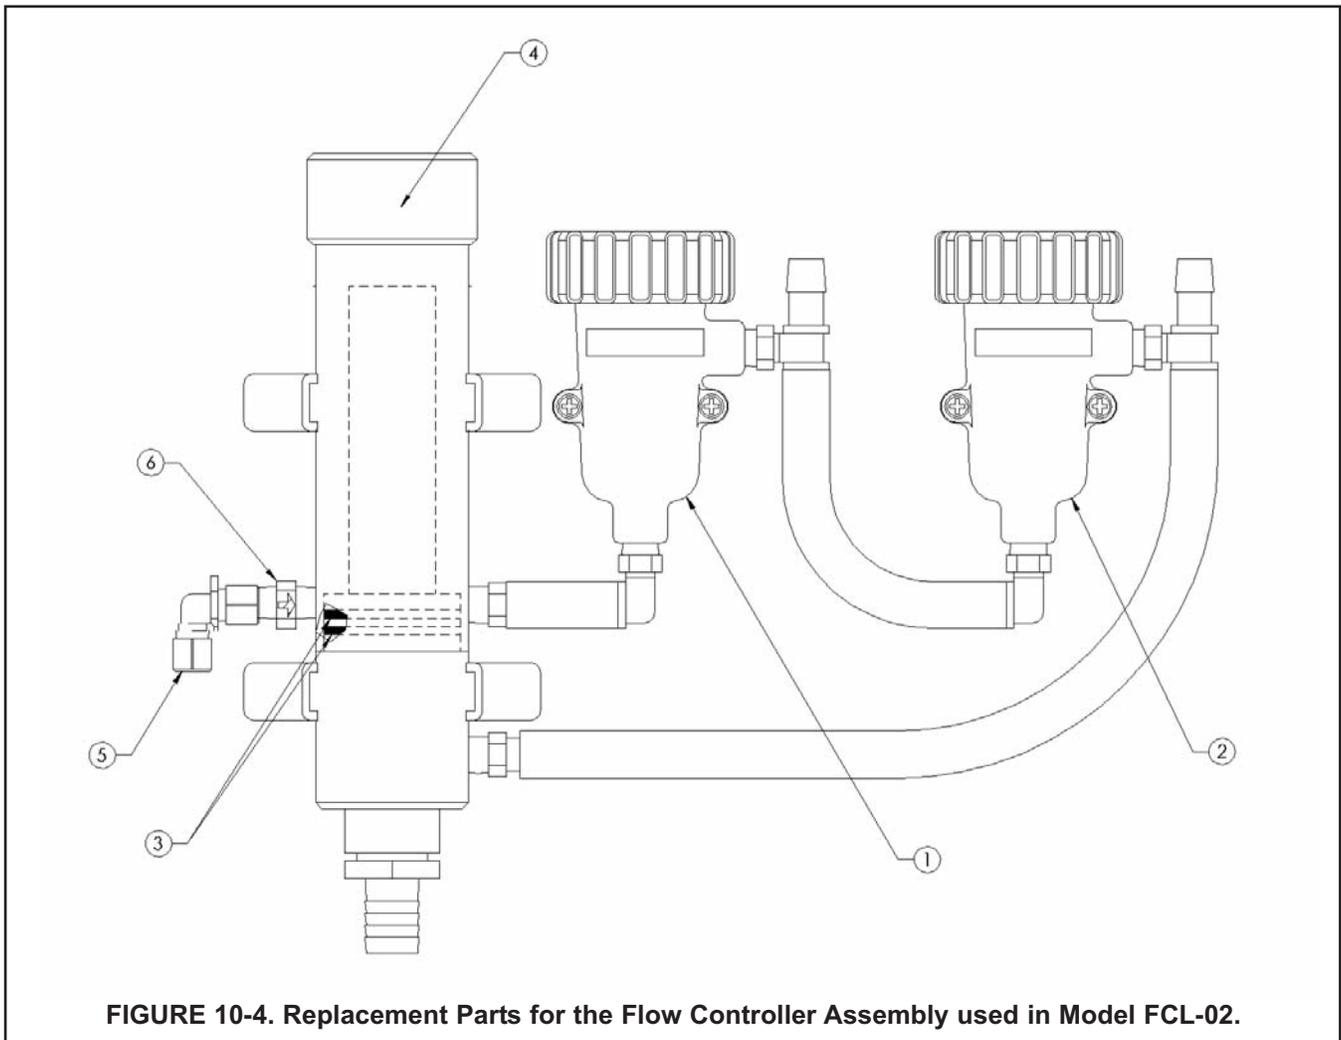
Replacement Parts for the Flow Controller Assembly used in Model FCL-02.
